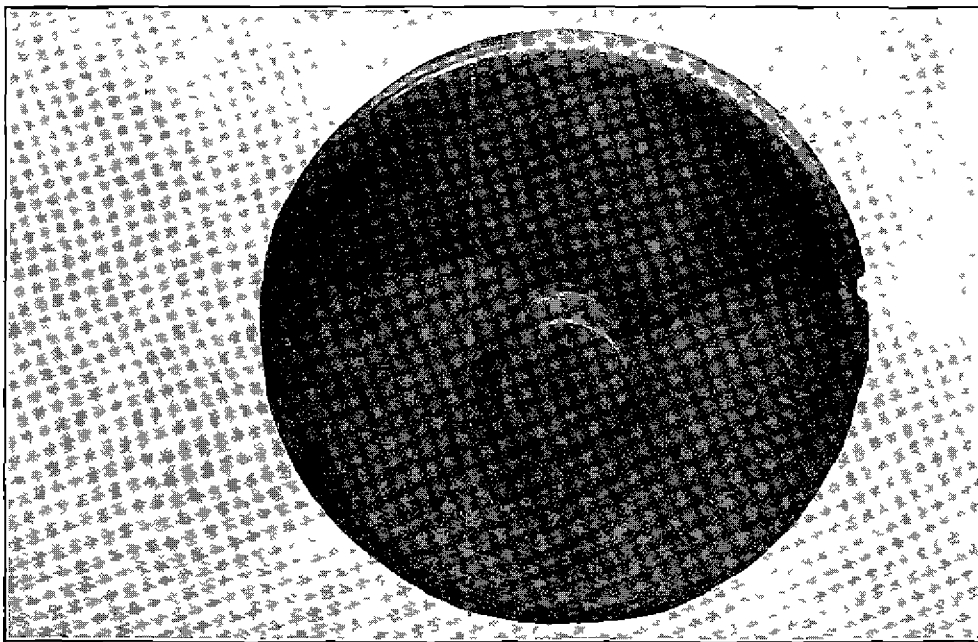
Front view of broken wheel No 57293, showing radial lines of rupture passing through chaplets in front plate. Initial point of rupture believed to be at rim on right side of this cut
